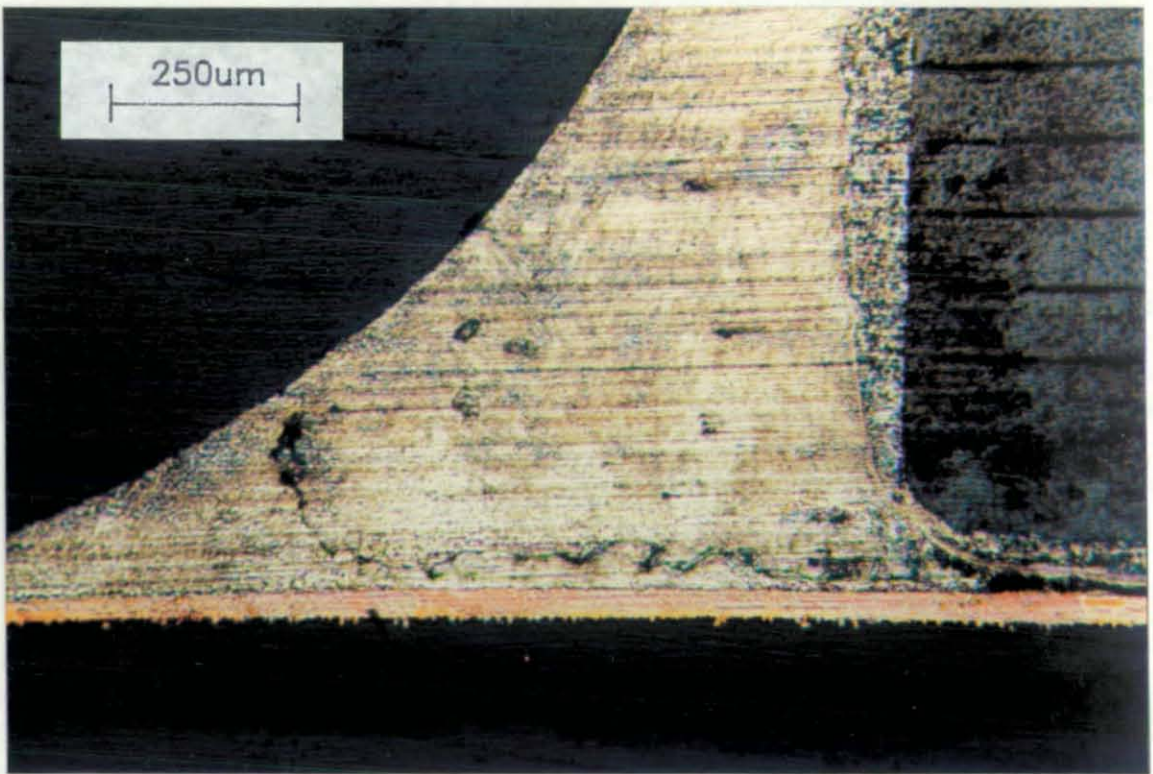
Fracture of Solder Fillet After Mechanical Cycling
